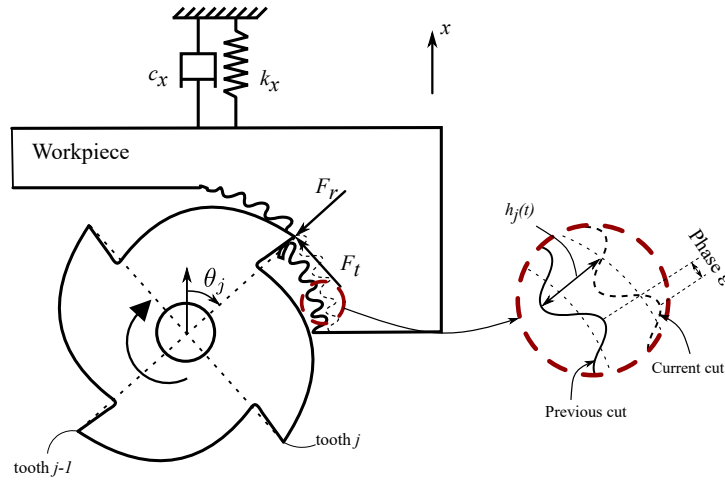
Regenerative chatter mechanism in a milling system consisting of a rigid cutting tool and a flexible workpiece [50, 51].
